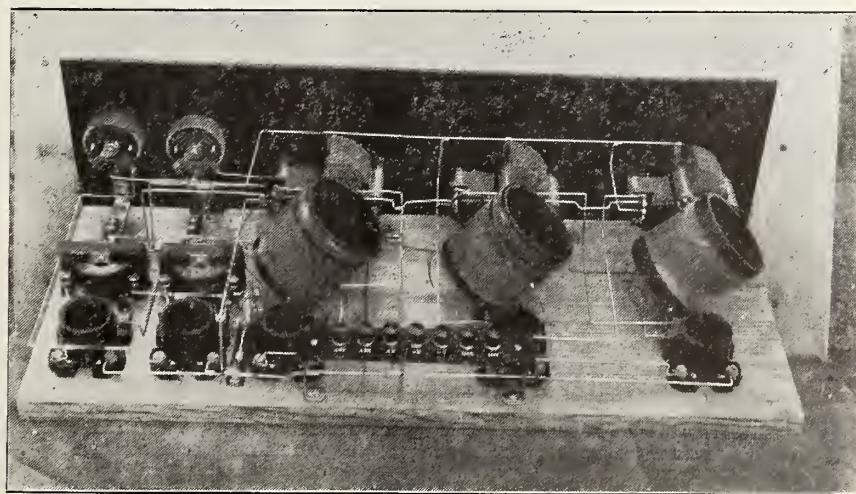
A tuned R. F. receiver laid out simply and efficiently. Sockets are all in a line, with their respective transformers behind them. Connecting wires are at the rear and rheostats and jacks used to fill the space at the left.
